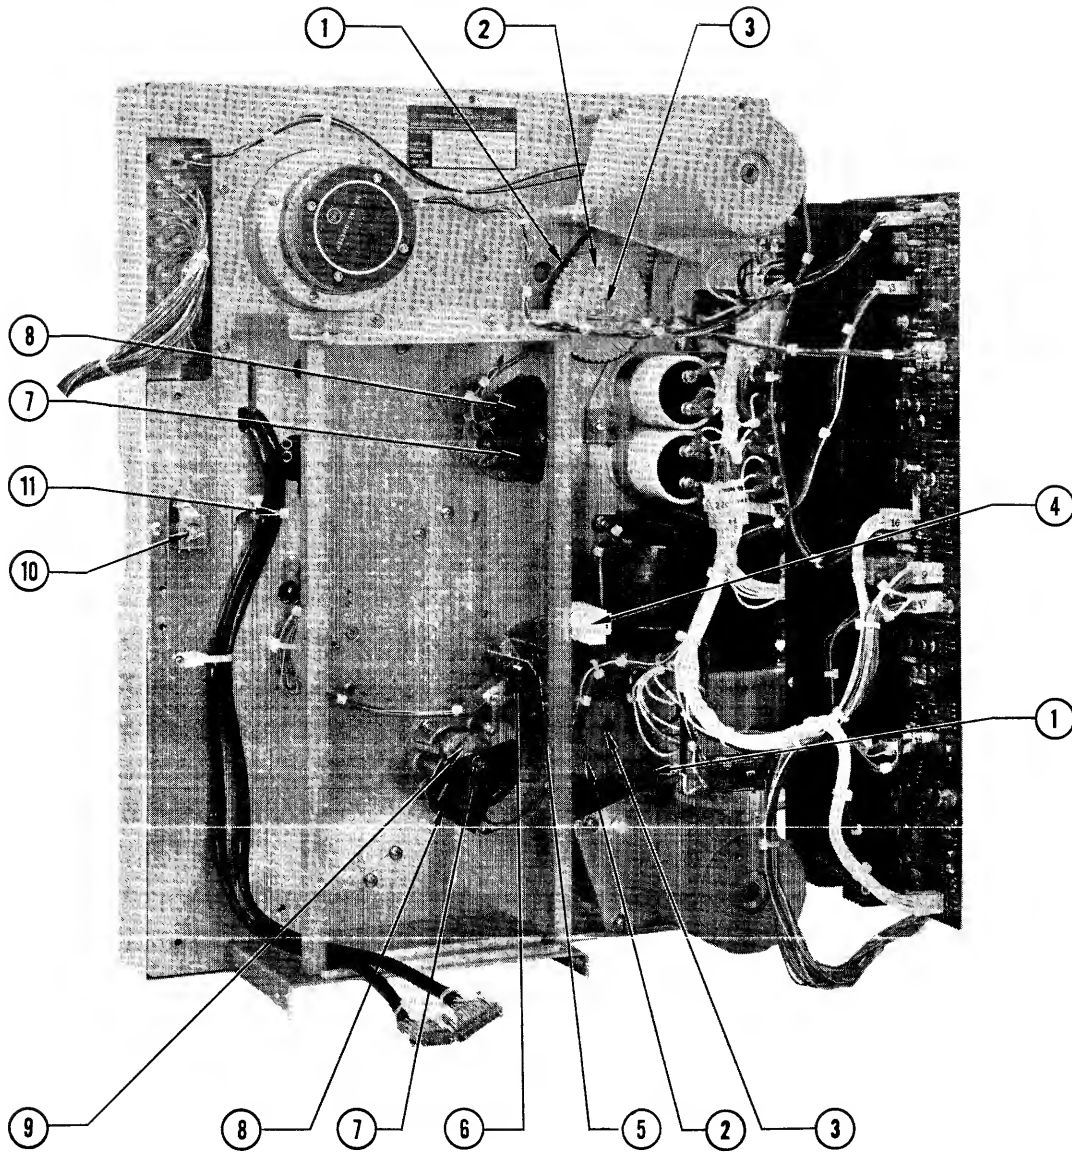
T6000 Series Transports Photo Parts Index, Rear View
